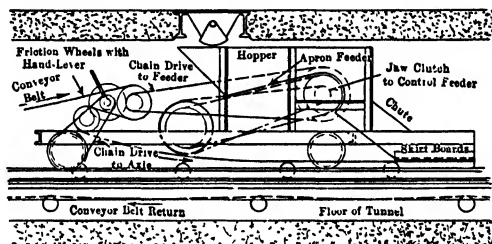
Traveling Hopper with Feeder Taking Power from the Conveyor Belt.
